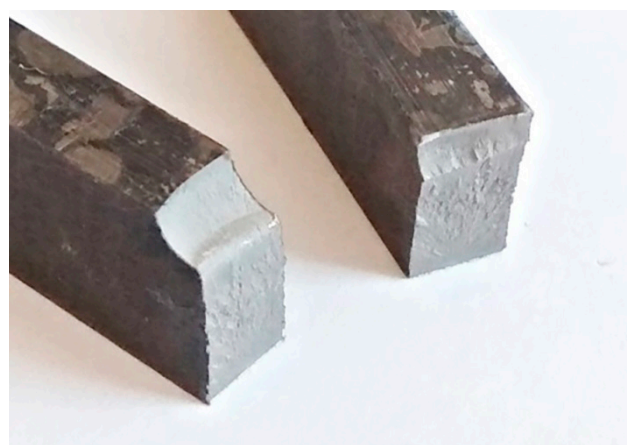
Fracture surface appearance – vegetable oil (bending test)
